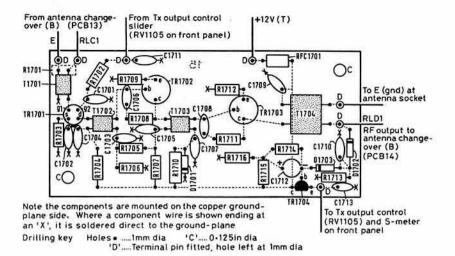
Component layout of the transmitter preamplifier board. R1, not shown here, is soldered to the wiring side of the board
